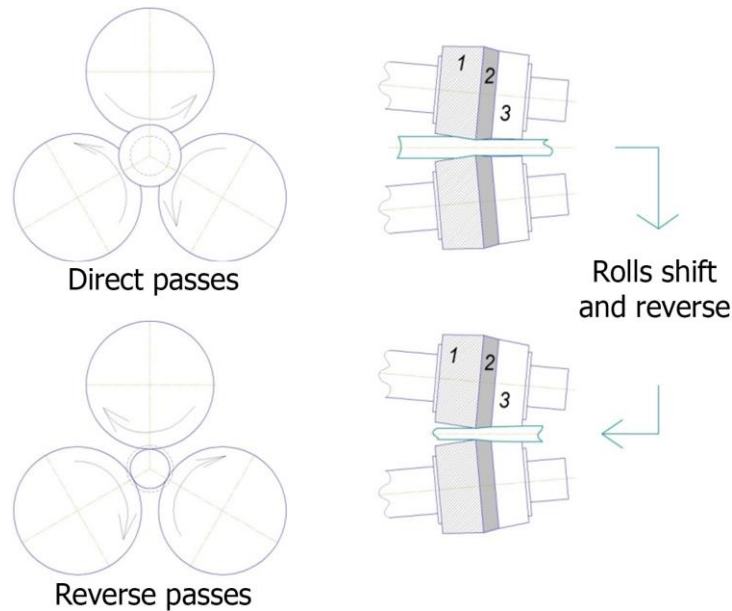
Radial-shear rolling scheme: 1 – crimping section for straight passes; 2 – calibration section for all passes; 3 – crimping section for reverse passes
